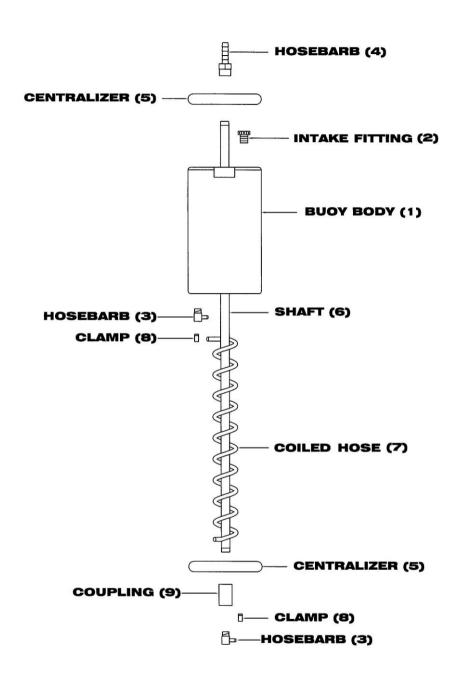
4" Heavy Oil Skimmer Assembly
